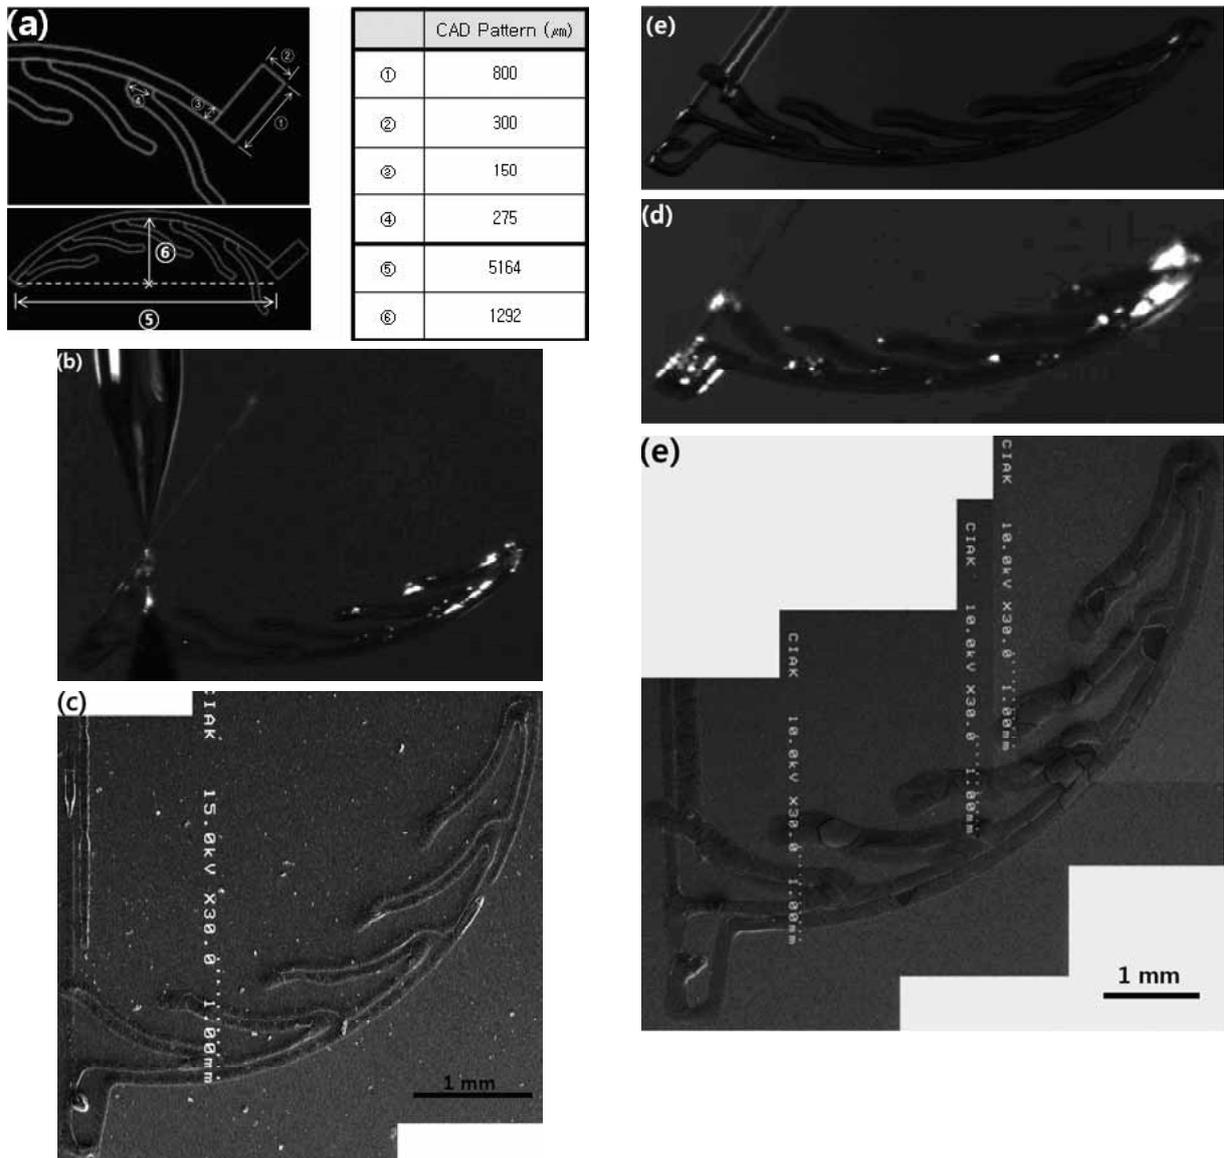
(a) The CAD design of foil bearing. (b) and (c) Optical and SEM images of foil bearing fabricated by direct ink writing process using titania sol-gel ink with dispensing tip having $30\ \mu\text{m}$ in inner diameter according to the original CAD design. Scale bar indicates 1 mm. (d) Optical microscope image of foil bearing fabricated by direct ink writing process using titania sol-gel ink with dispensing tip having $100\ \mu\text{m}$ in inner diameter according to the original CAD design. (e) and (f) Optical and SEM images of foil bearing fabricated by direct ink writing process using titania sol-gel ink with dispensing tip having $100\ \mu\text{m}$ in inner diameter. The g-code for the writing process was based on the 1.5 times of the original CAD design. Scale bar indicates 1 mm.
